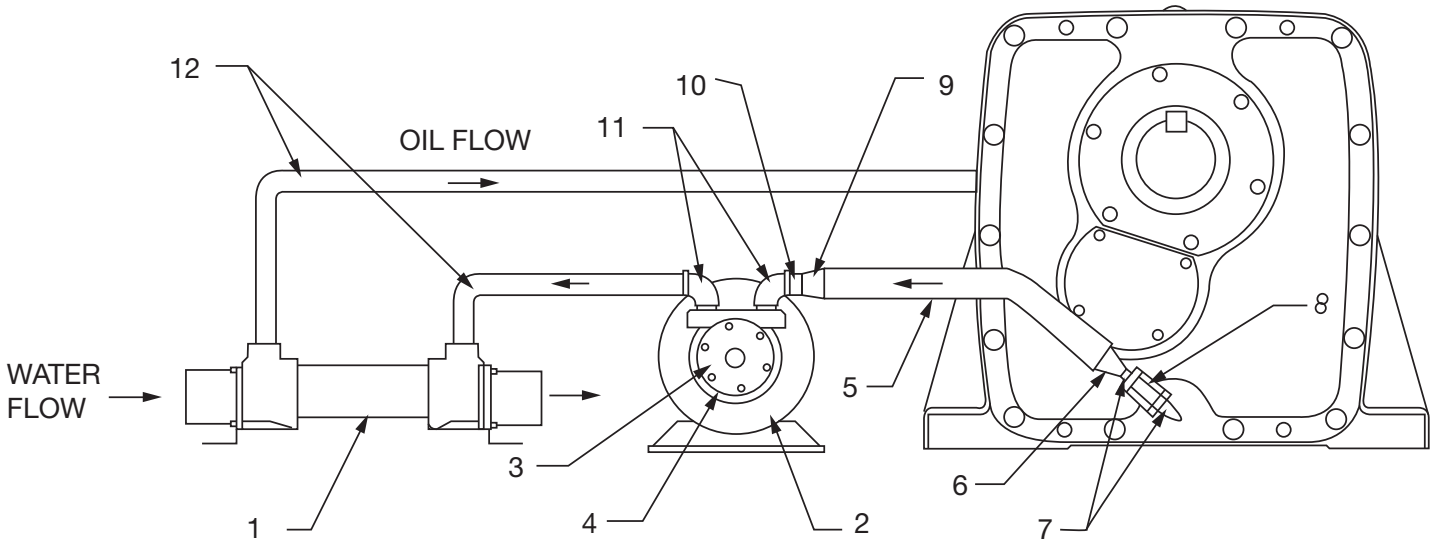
Cooling System for Maxum Concentric Speed Reducer
